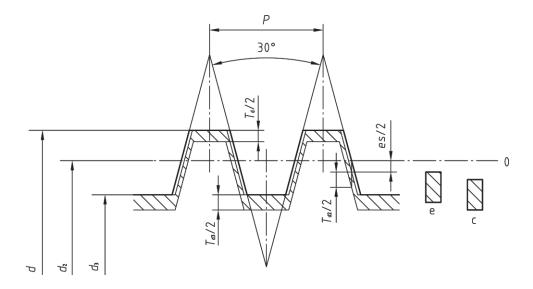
External threads with tolerance positions c and e for the pitch diameter
